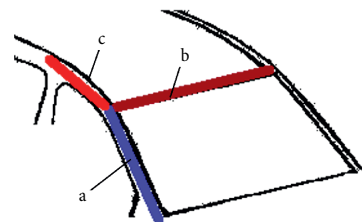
Simplified typical roof structure: a – A-pillar; b – roof front header; c – roof side rails (Dzerkelis, Bazaras 2013)
